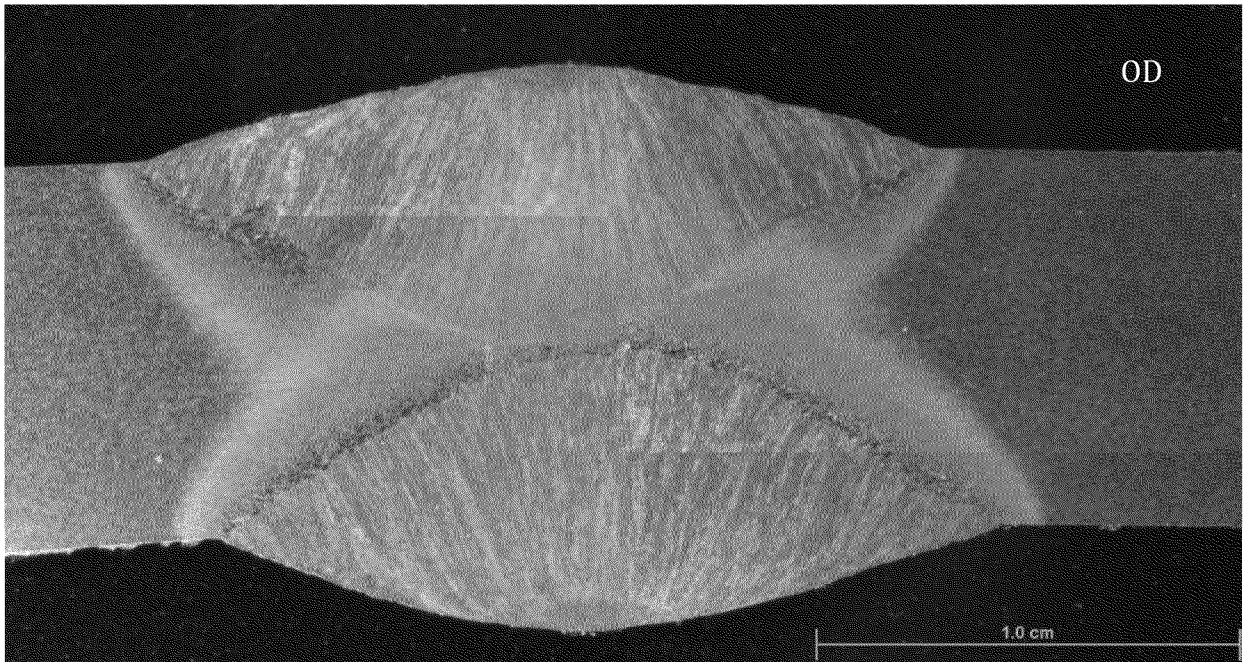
Stereomicroscopic montage that shows the T117-CC-T-W weld seam.
